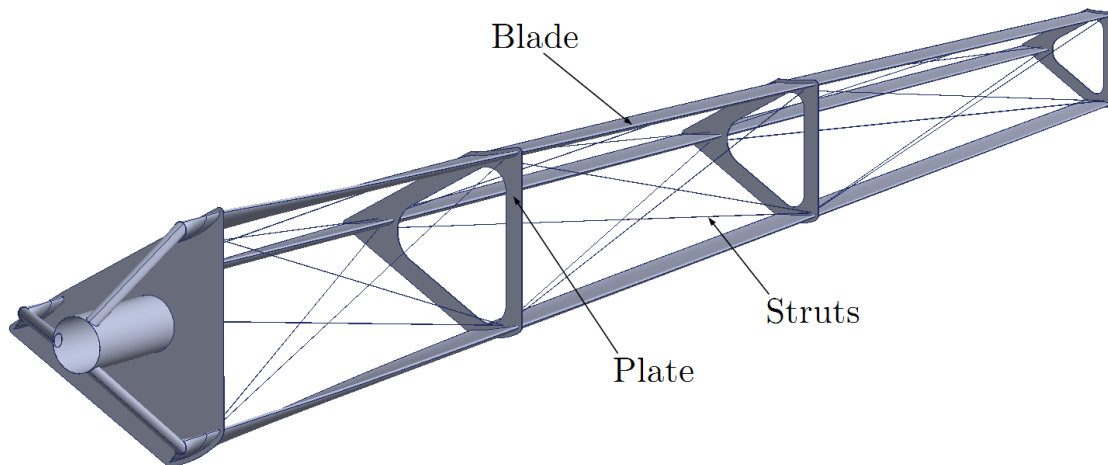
Example prototype CAD drawing of the Triblade. Courtesy of Winfoor.
